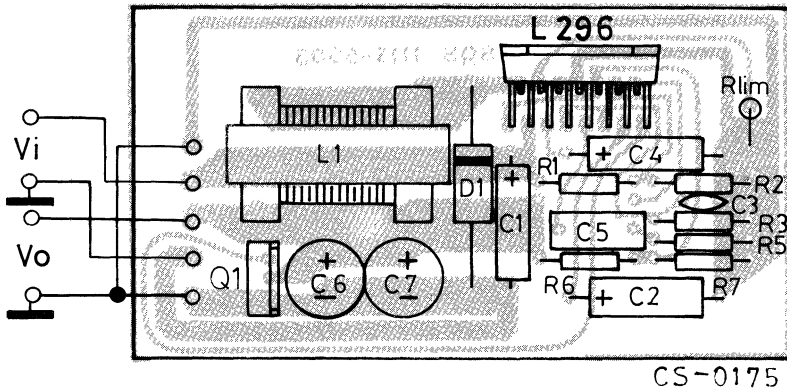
P.C. board and component layout of the circuit of fig. 4 (1:1 scale)
